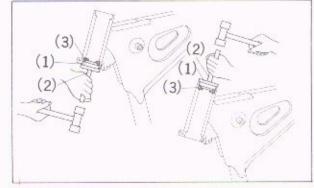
(1) Ball race driver attachment (2) Driver handle (3) Ball race
